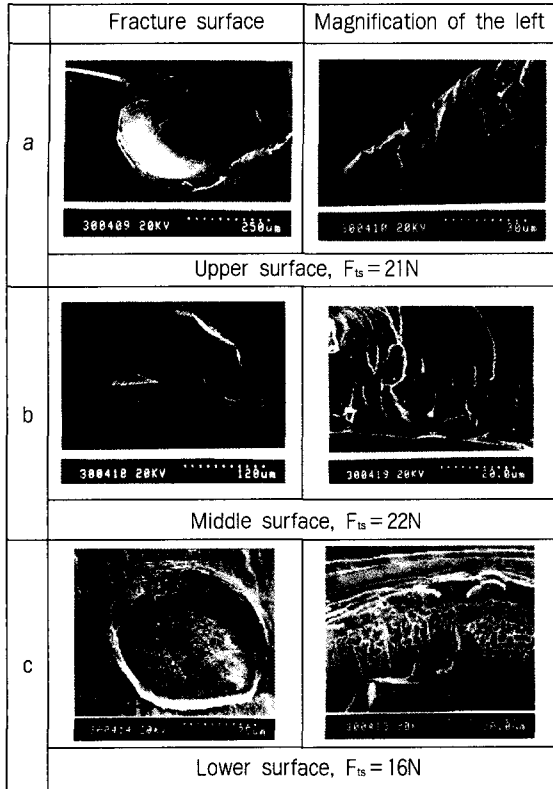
Photomicrograph (SEM) of welding point after tensile shear test
